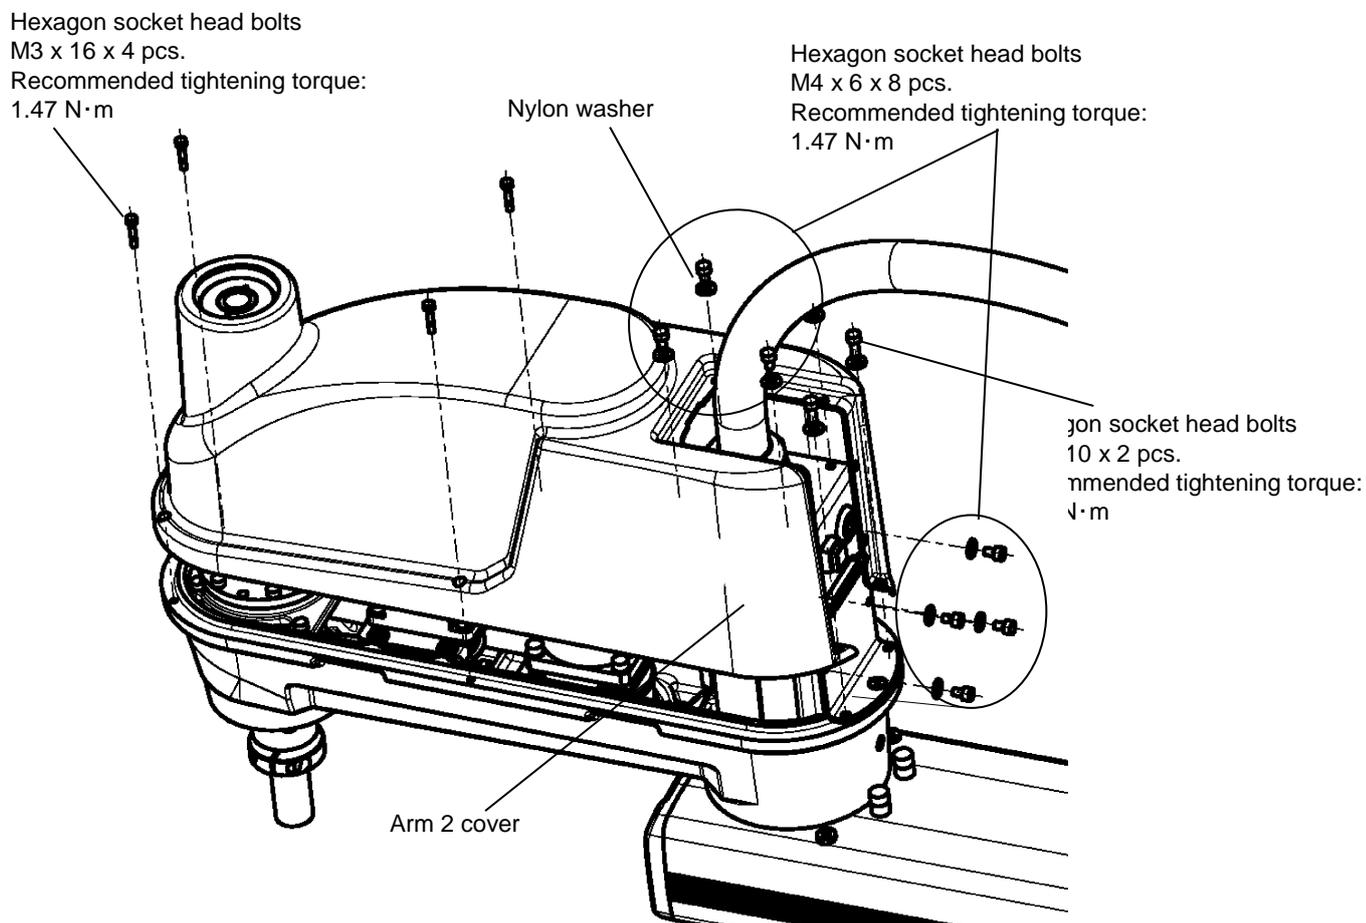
Removing the Arm 2 Cover (KHL-500, KHL-600 and KHL-700)
